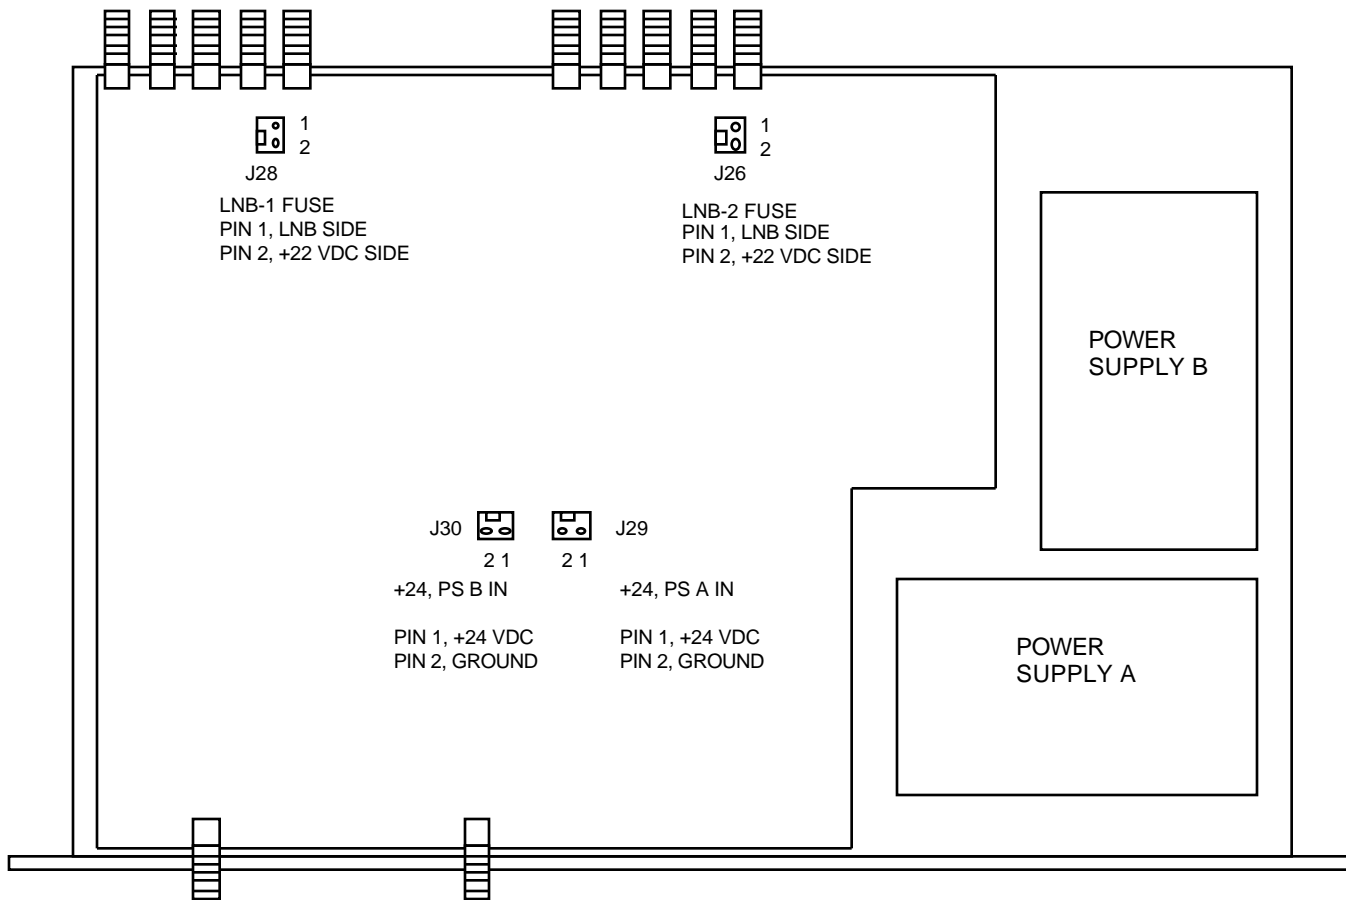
1584-25 MECHANICAL ASSEMBLY
